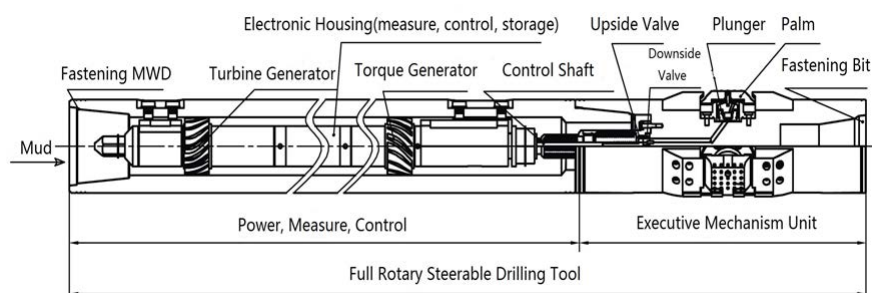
Elements of Full Rotary Steerable Drilling Tool
